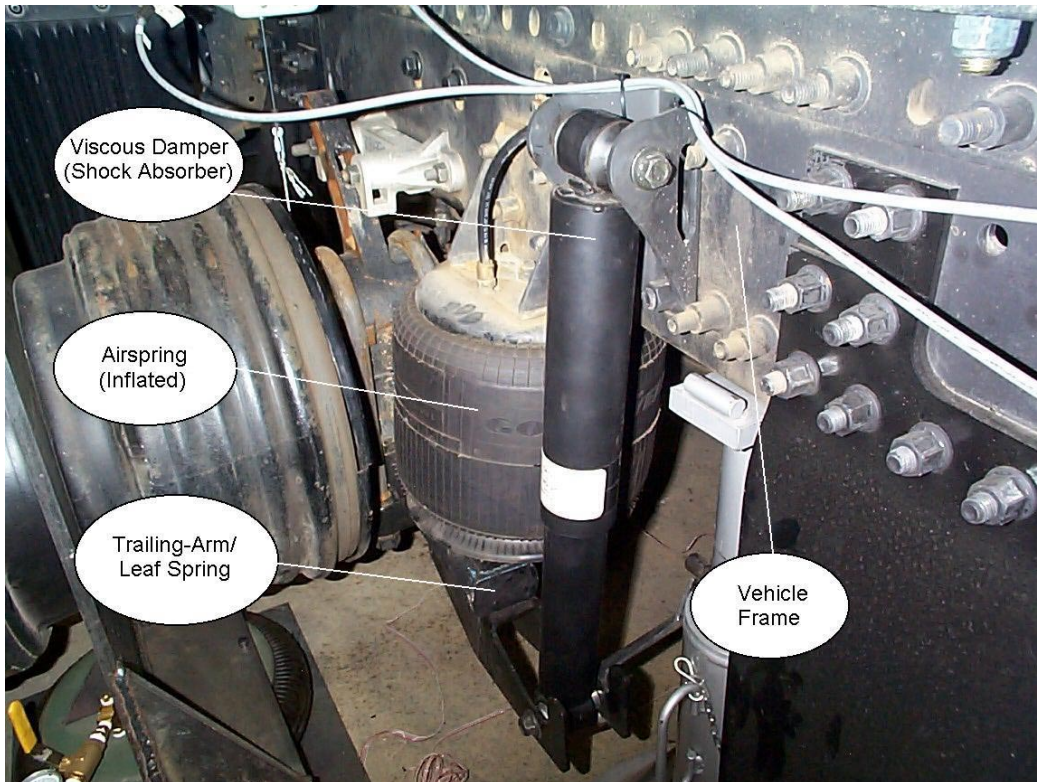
Prototype Trailing-Arm Drive Axle Suspension – Rear View.
